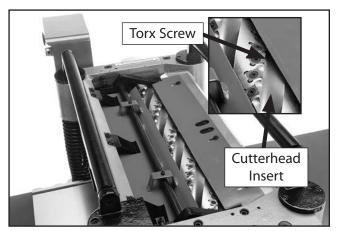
Example of cutterhead inserts and Torx screws (actual machine not shown).
